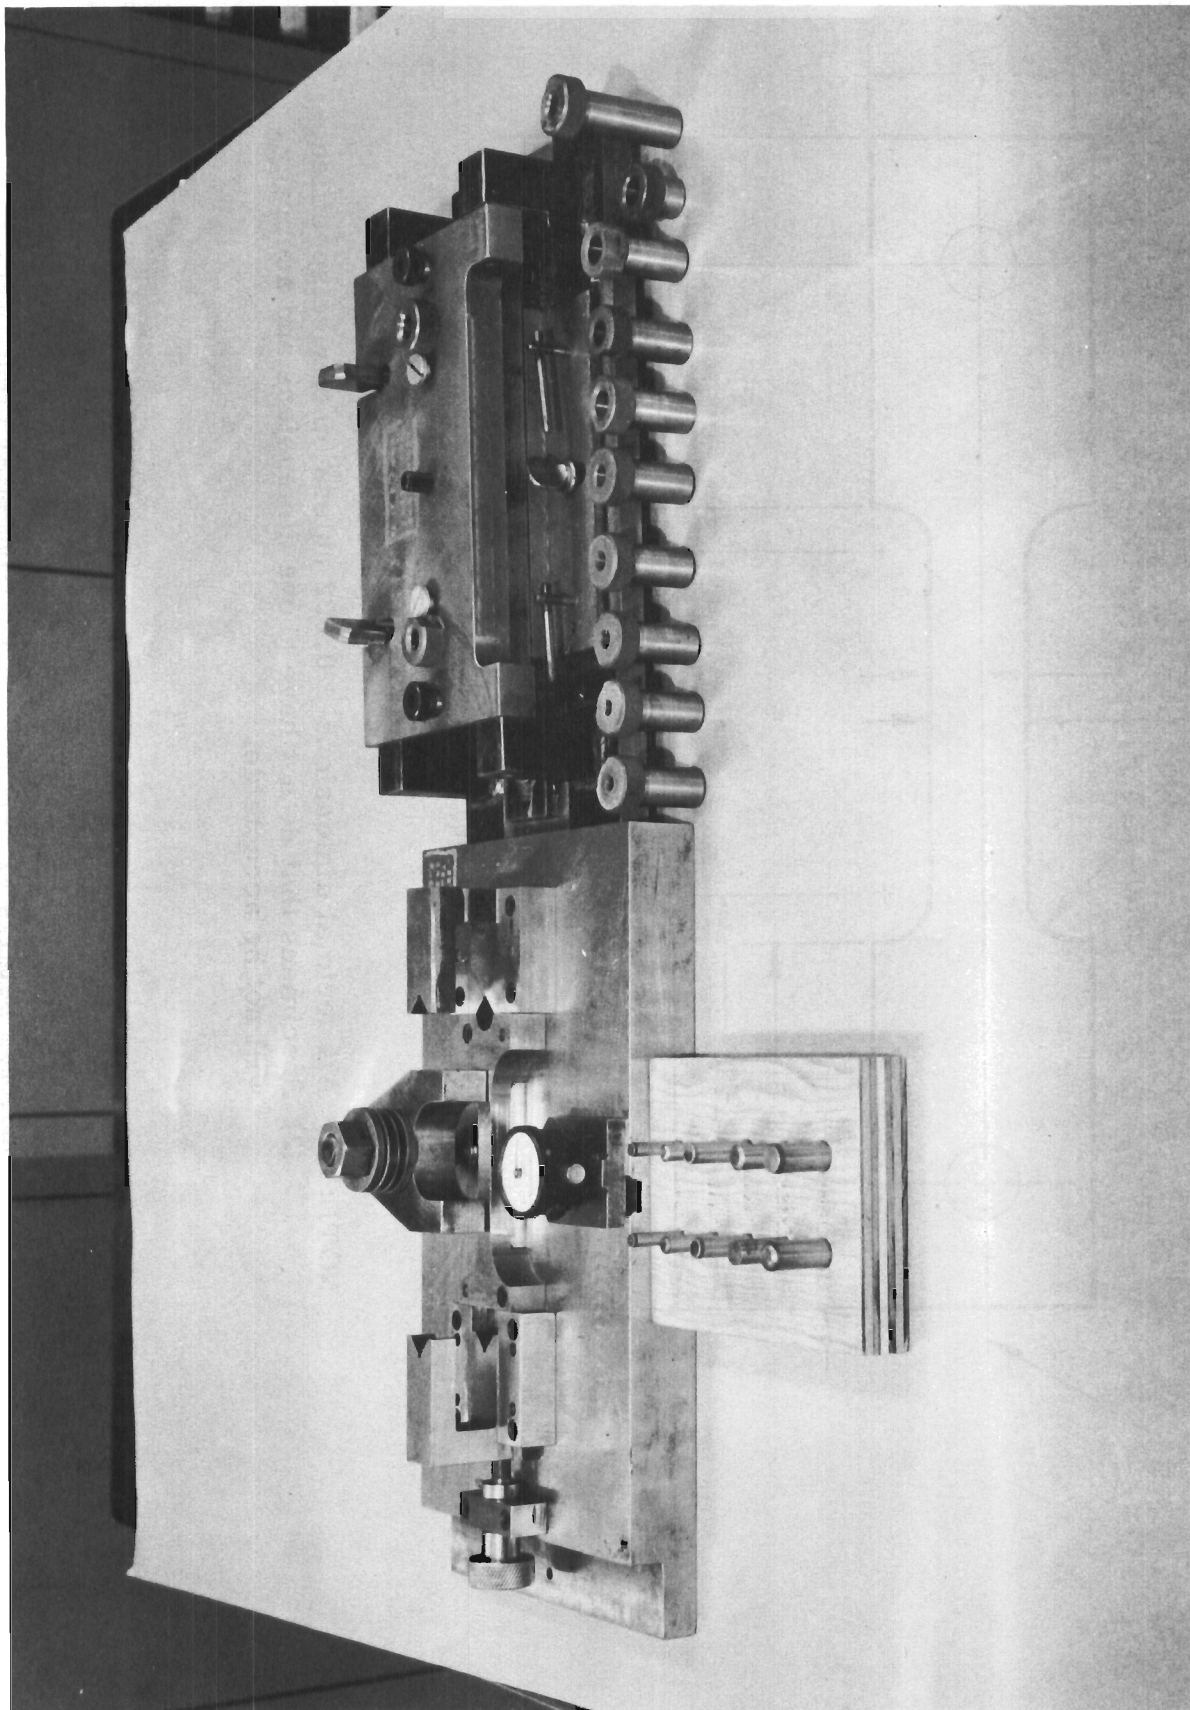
Mill and Drill Fixture Employed for the Fabrication of Test Specimens
